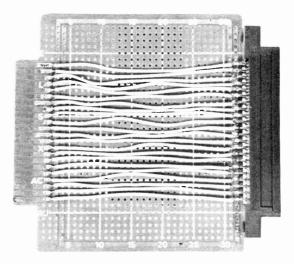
Construction of a 44-way extension board which makes possible testing of boards in situ
